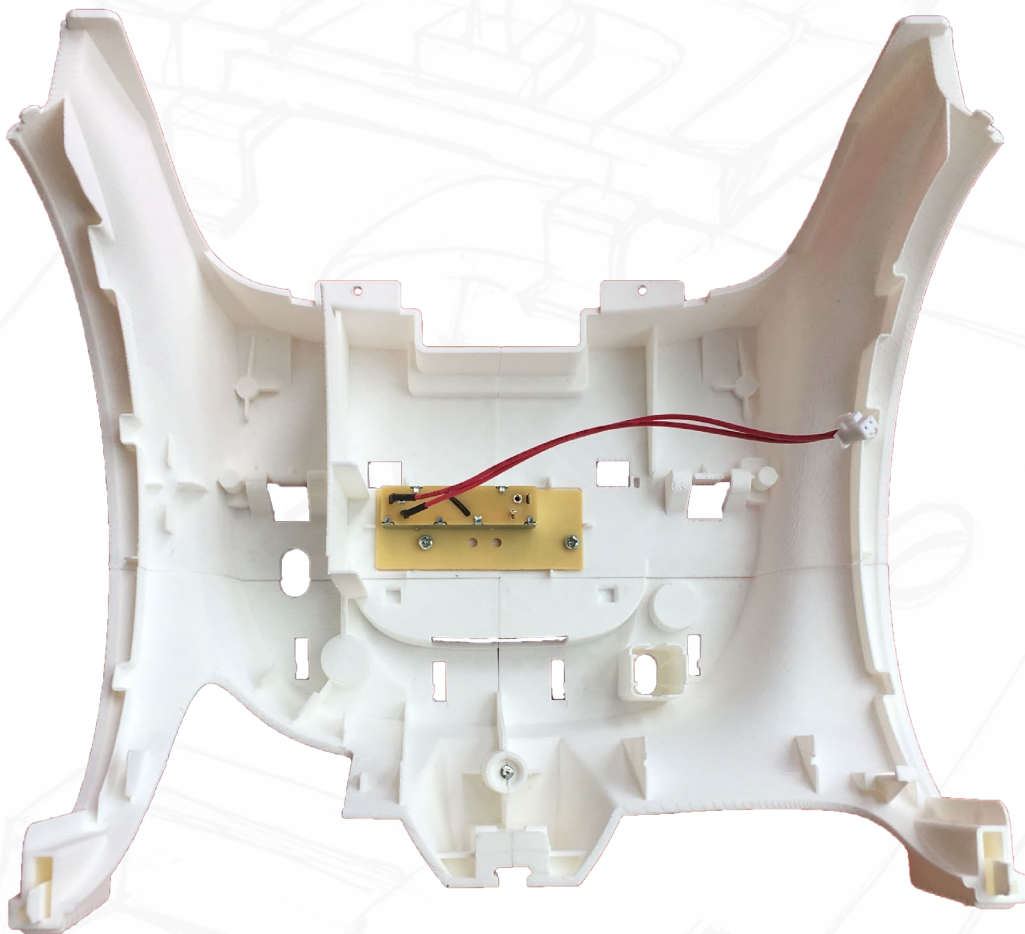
bottom view of the 3D printed model of the redesigned rear housing. Bottom-up assembly of the power slider using Phillips 1 screws
